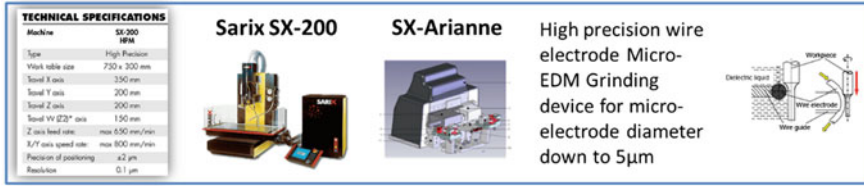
μEDM machine (Courtesy of CNR-ITIA)
